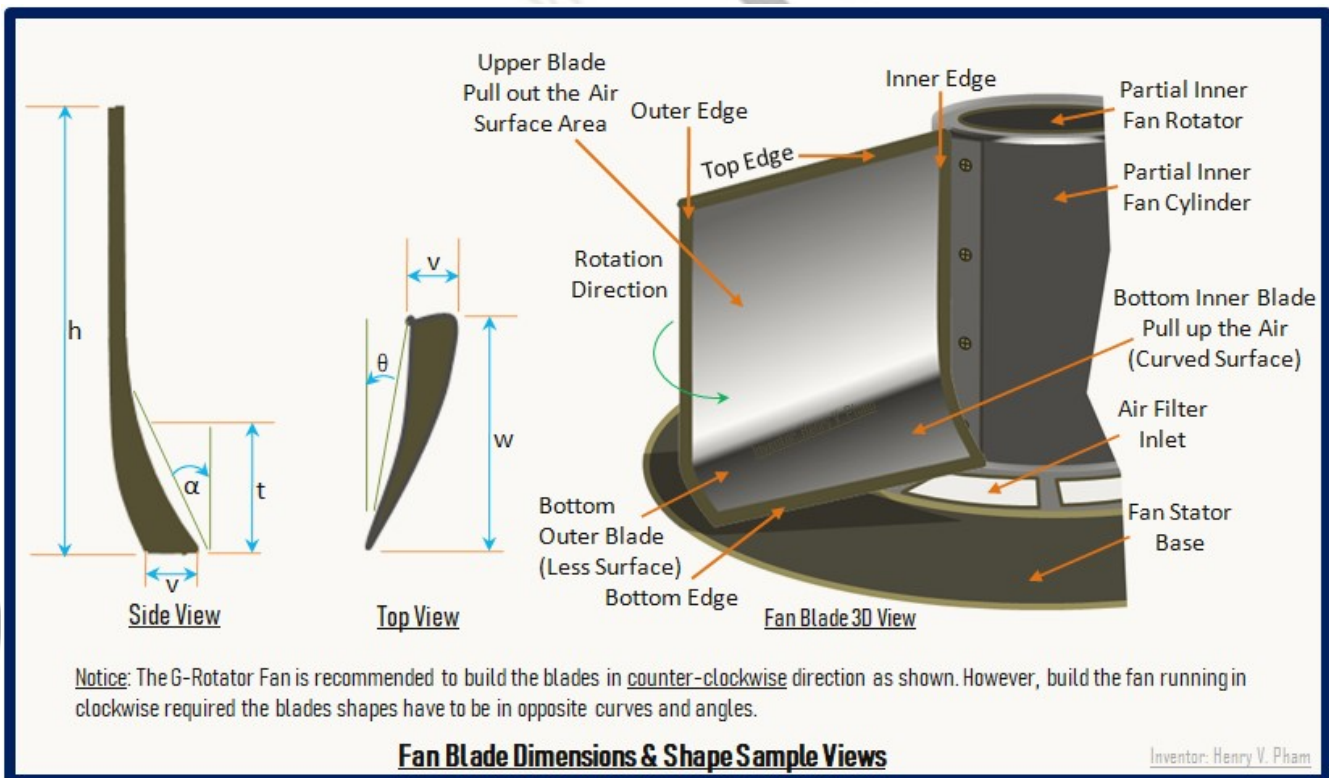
360° Stand G-Rotator Fan -Fan Blade Shape
